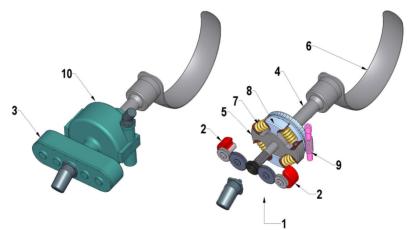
Three-dimensional drawing of the oscillator-blade unit: 1) gear; 2) eccentric masses; 3) gear housing; 4) shaft; 5) horizontal butterfly bush; 6) semicircular blade; 7) springs; 8) vertical butterfly bush; 9) worm screw; 10) worm gear housing
